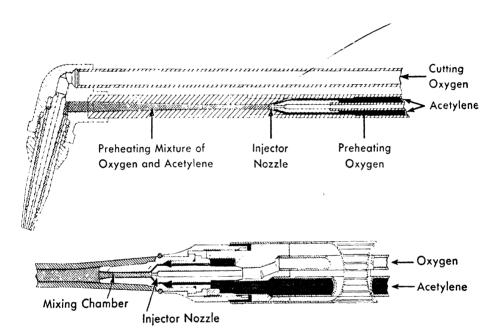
An injection type cutting torch (top), and a welding torch (bottom). The acetylene (red) is induced (drawn) into the mixing chambers by the pulling action (suction) of the oxygen (yellow) jet. The mixture of oxygen, and acetylene are shown as checked red and white. These injector torches are particularly adaptable for use with acetylene generators which operate under low pressure
